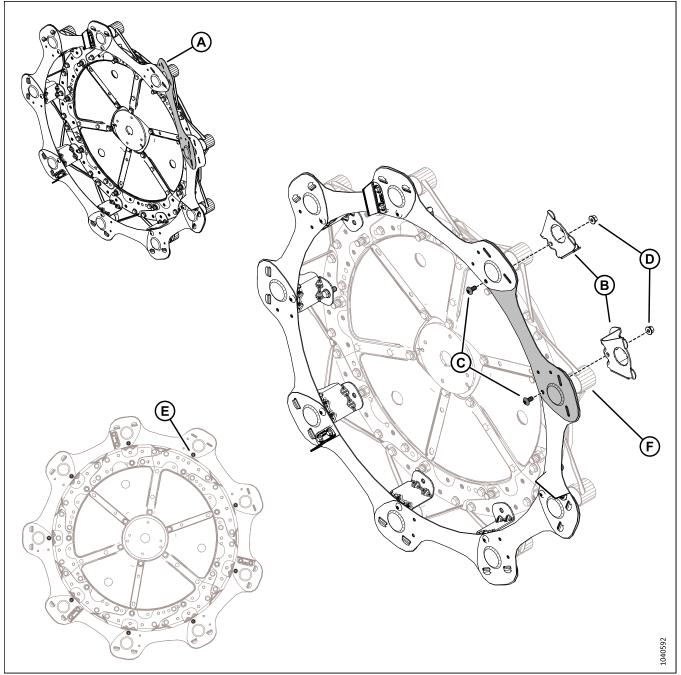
Nine-Bat Reel – Initial Endshield Assembly
